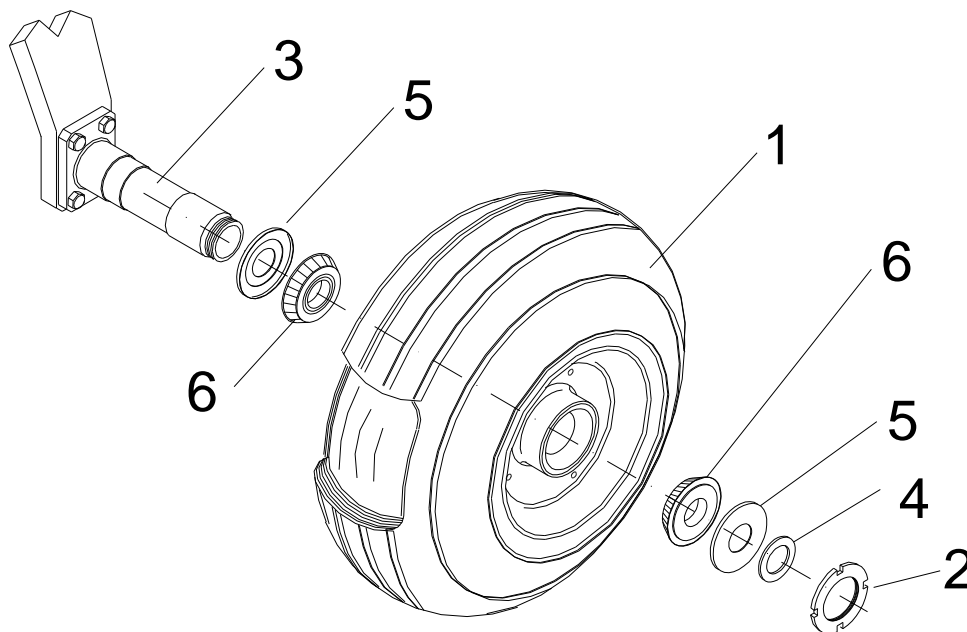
REMOVAL OF THE MLG WHEEL ROLLER BEARINGS
